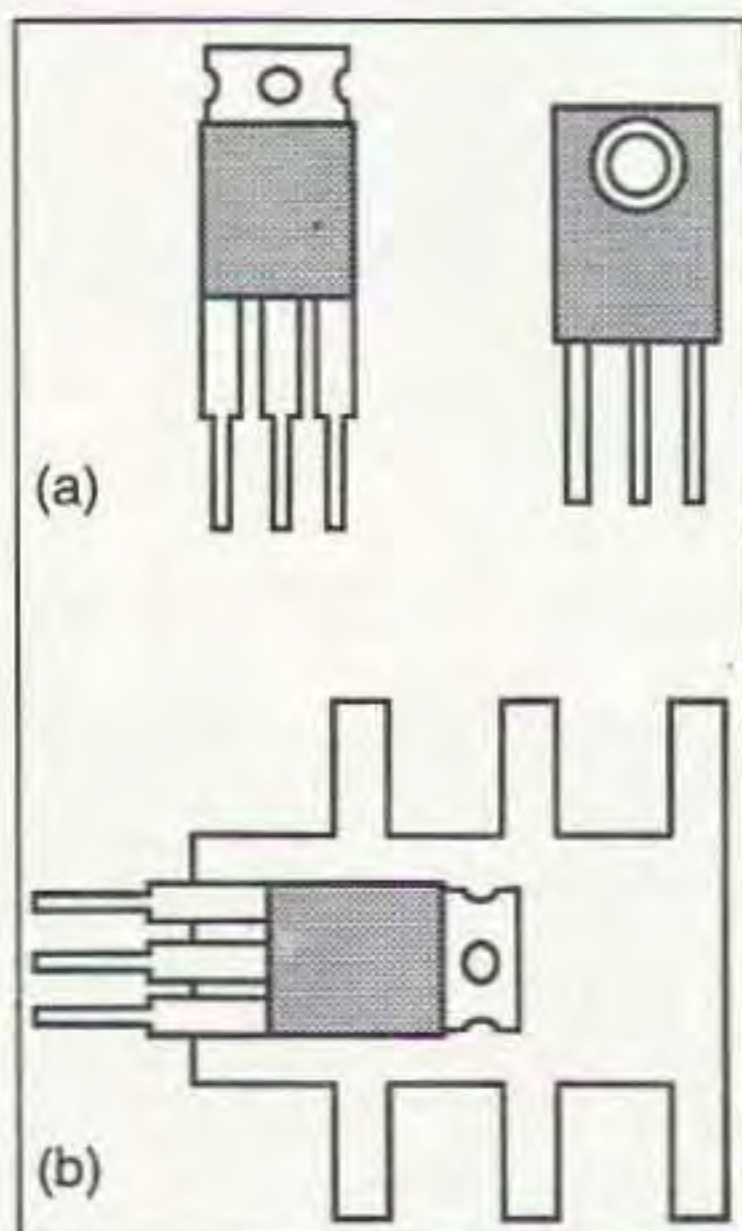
a) TO-220 and other plastic power transistor package; b) TO-220 device mounted to sheet metal heat sink.
